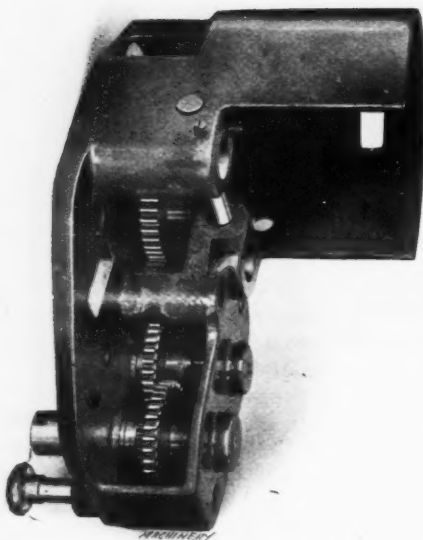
Gear-box for Gears employed to drive Feed-rod
